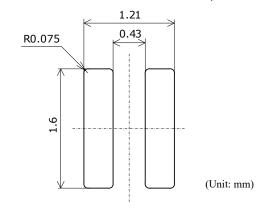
Soldering Pad Pattern and Metal Solder Stencil Aperture Pattern Recommended for the NCSx170x
